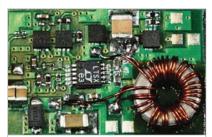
The complete power supply fits onto a 23×15×3.5-mm PCB.
